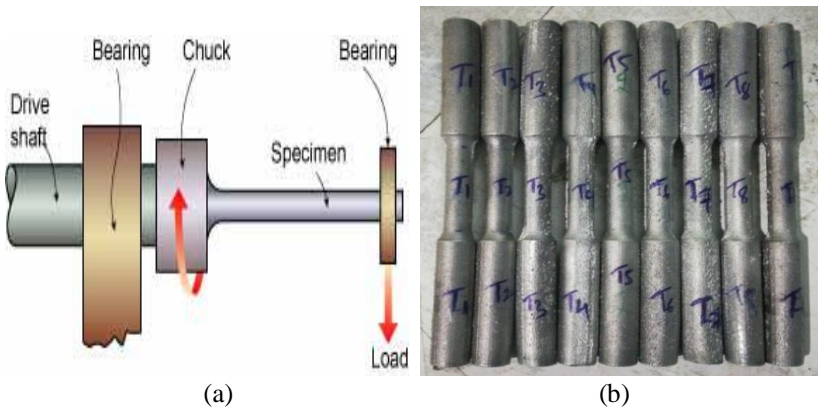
a) Fatigue testing machine, and b) SLM manufactured parts
